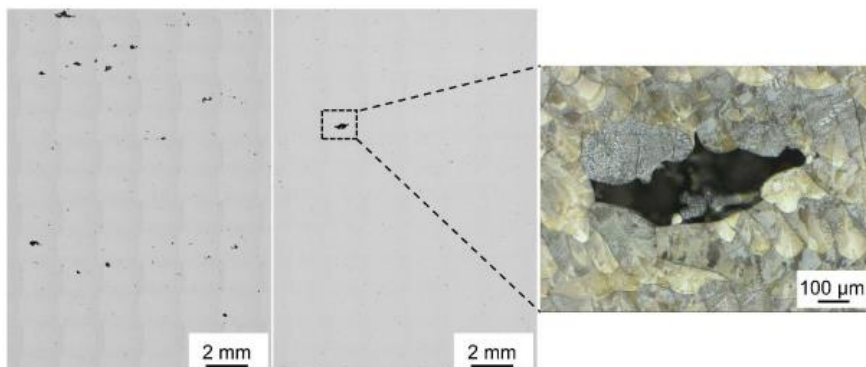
Cross-sectional views of a specimen containing stochastic flaws [52].
